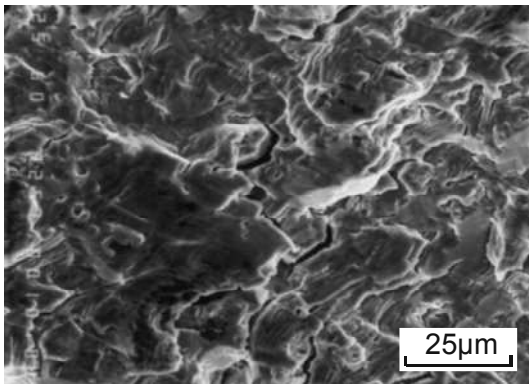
Variant B specimen fatigue fracture after fatigue tests ( $\Delta\epsilon_f=0.8\%$ ) at 20°C. Mixed transcrystalline fracture
